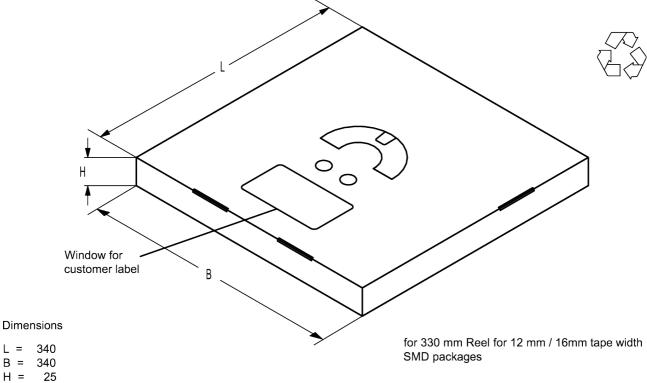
Drawing of folding box for reel with diameter of 330 mm.
